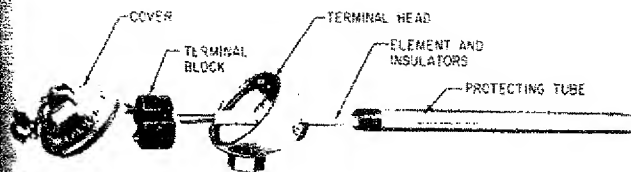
Assembly of industrial thermocouple, terminal block, and protecting tube. (Honeywell.)
